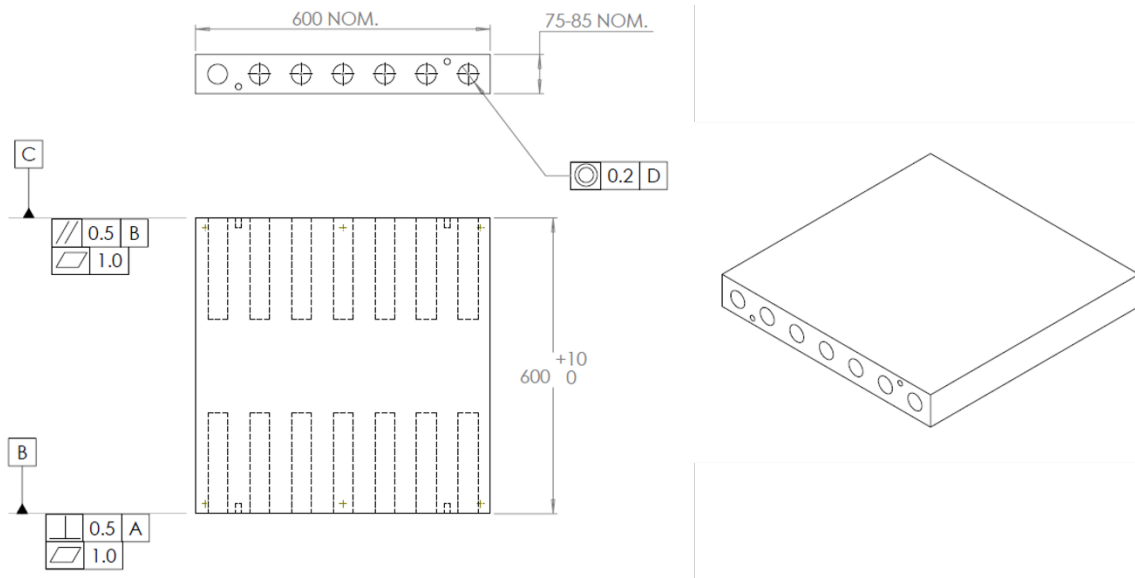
CAD drawing of the large composite blanks after machining (dimensions in millimeters)
